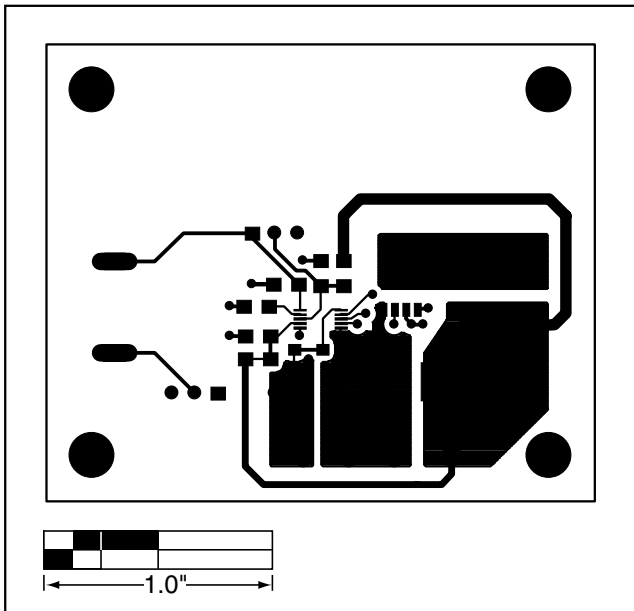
MAX1791 EV Kit PC Board Layout—Component Side
